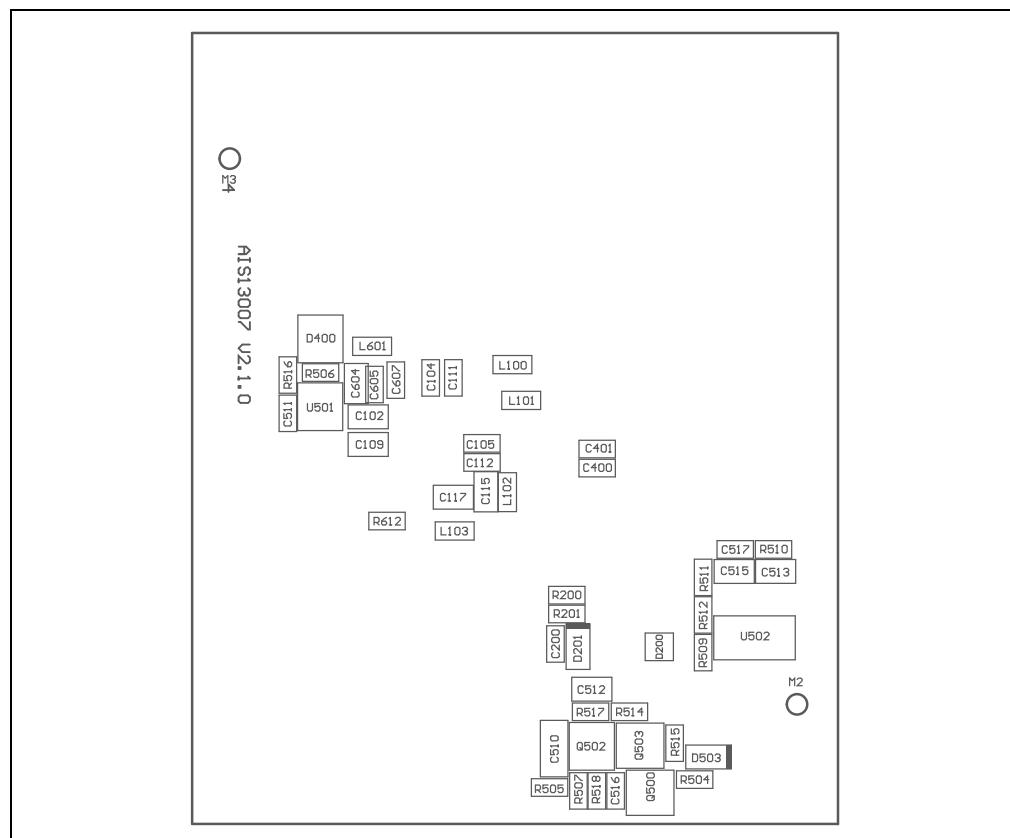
ASSEMBLY PLAN – TOP VIEW AND MECHANICAL DIMENSIONS
